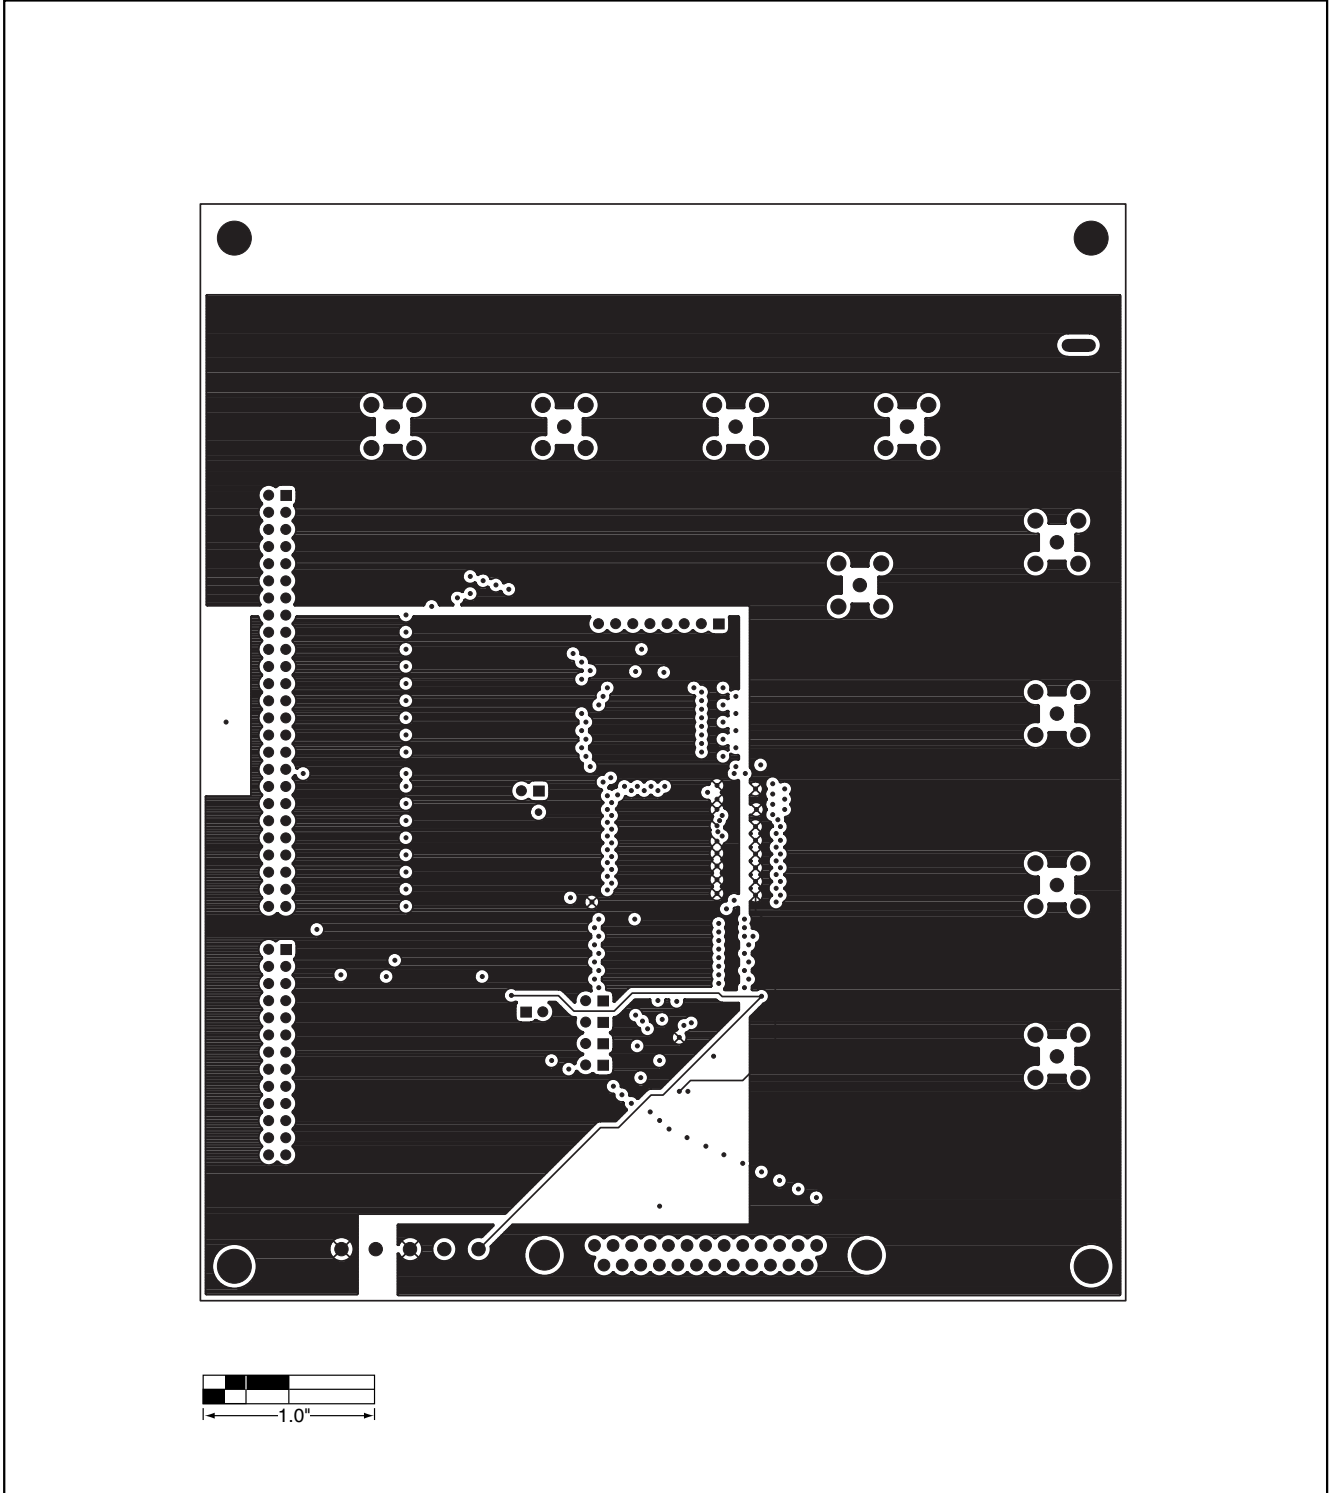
MAX4358 EV Kit PC Board Layout—Layer 3
